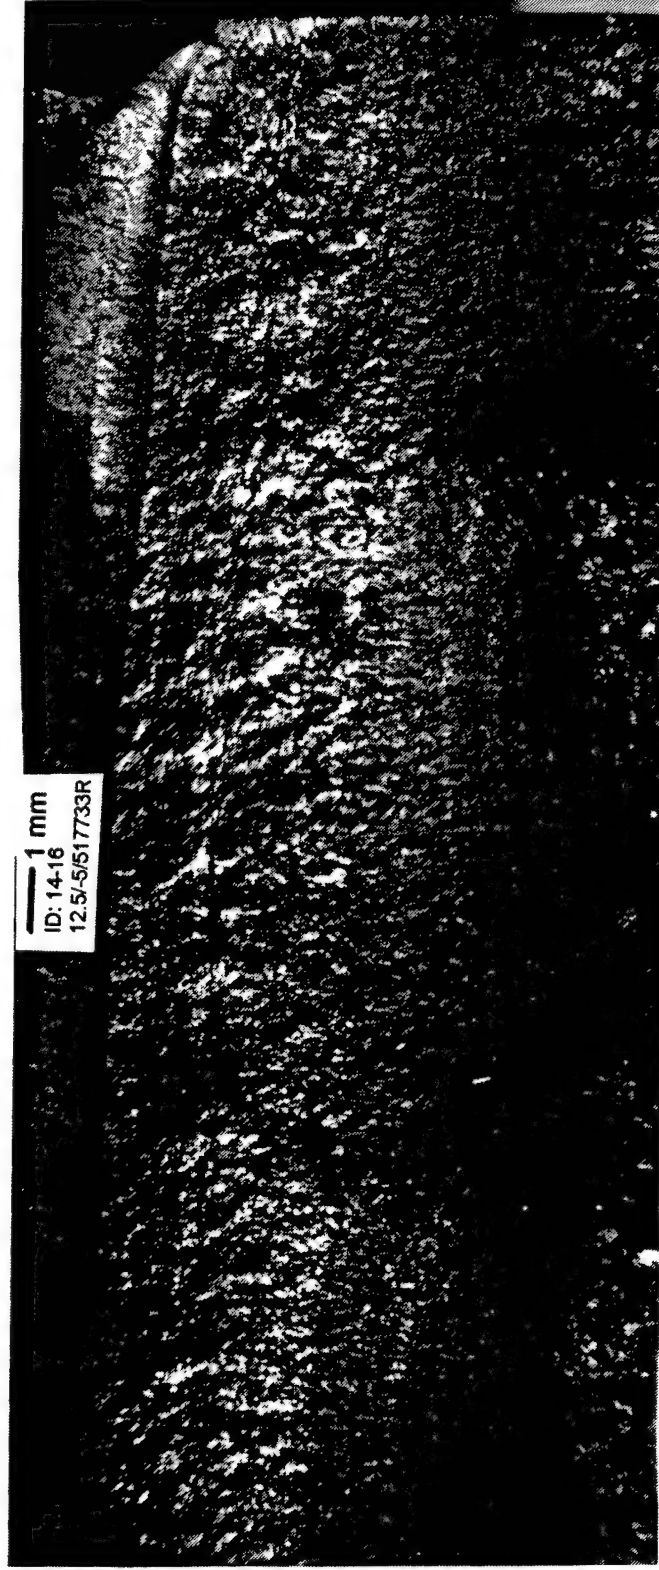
Fatigue fracture surface of the HSLA-80 but weld sample subjected to random loading:
